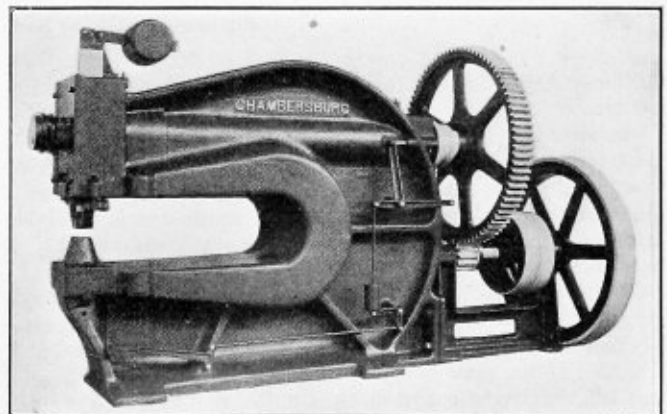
Single End Punching Machine with Mechanical Control and Belt Drive
